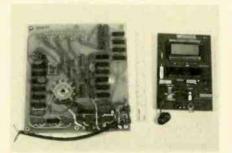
TWO TYPICAL PC boards with problem shapes. They won't fit into standard cabinets.
